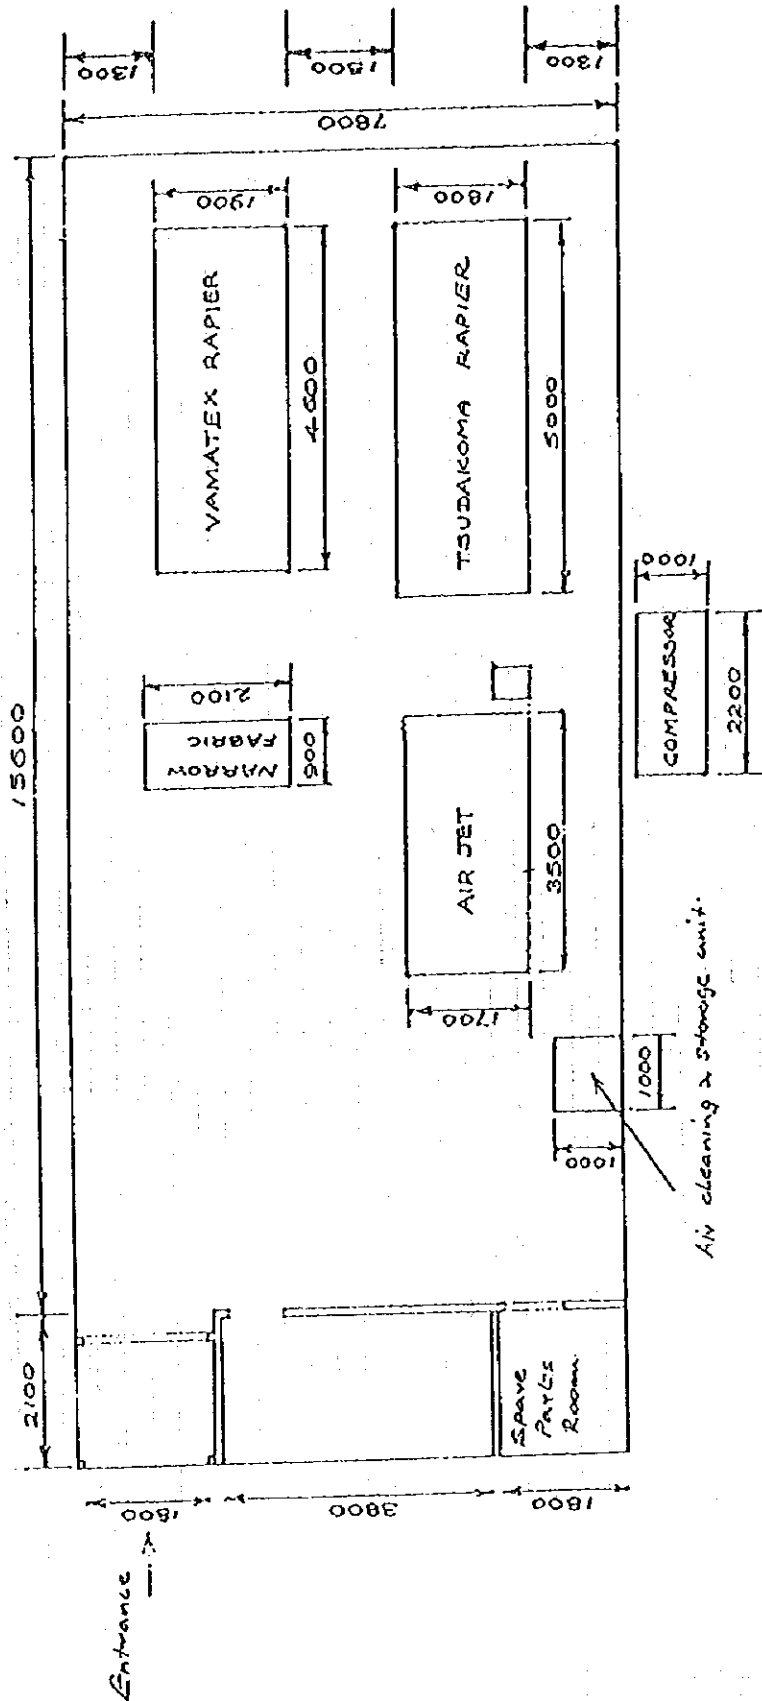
PROPOSED LAYOUT OF SHUTTLE-LESS LOOM WORKSHOP
